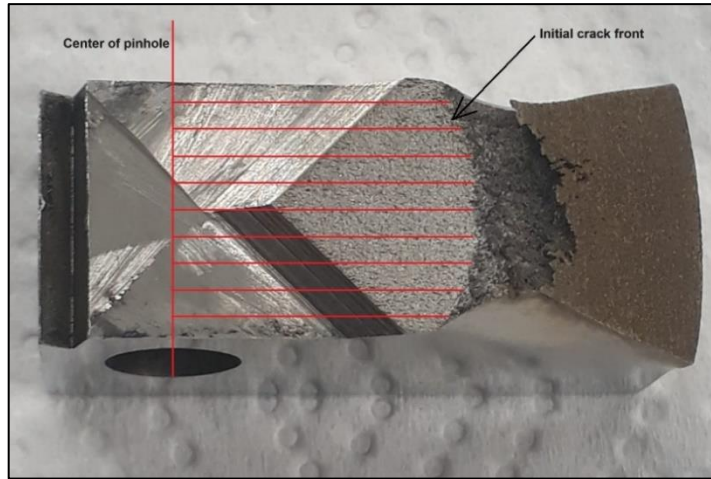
Measurement of crack length up to initial crack front of broken fracture toughness test specimen.
